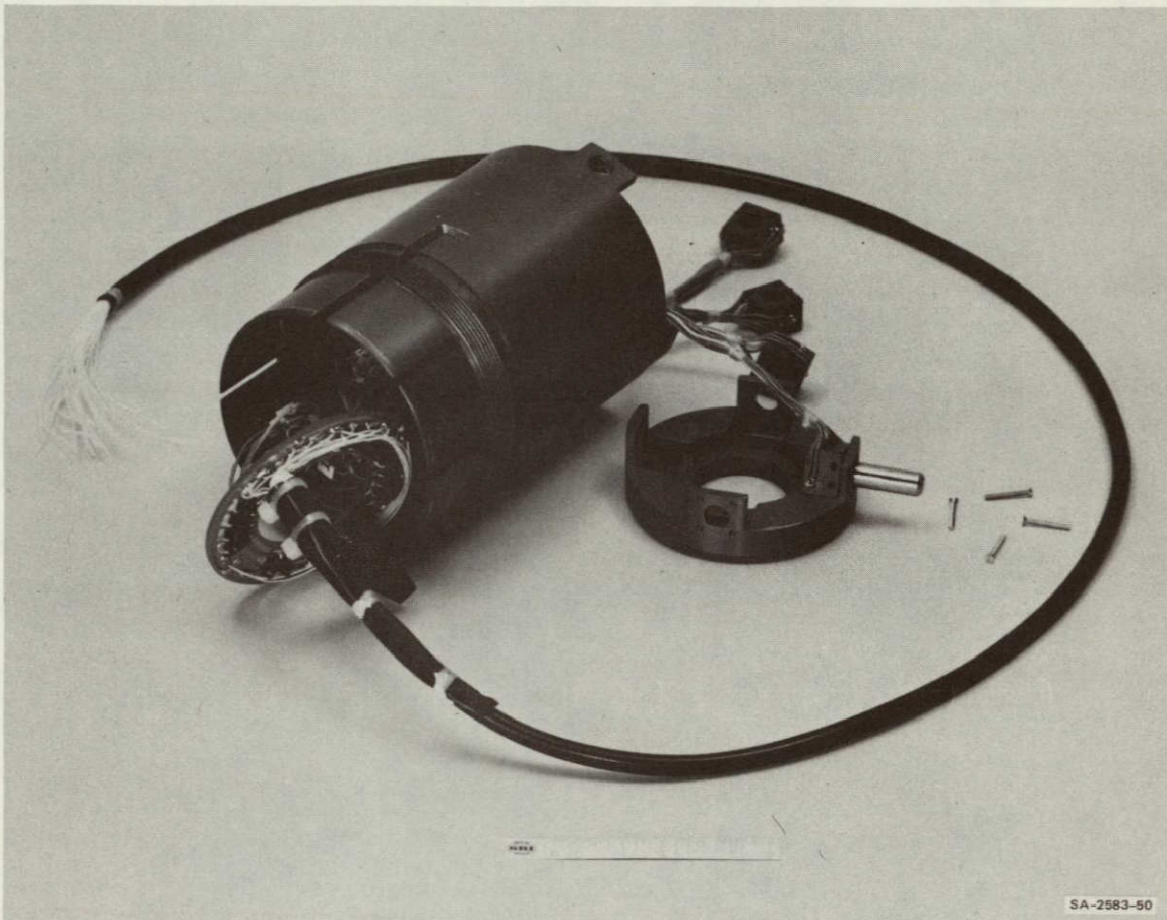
ATTACHMENT OF SENSING BLOCKS
